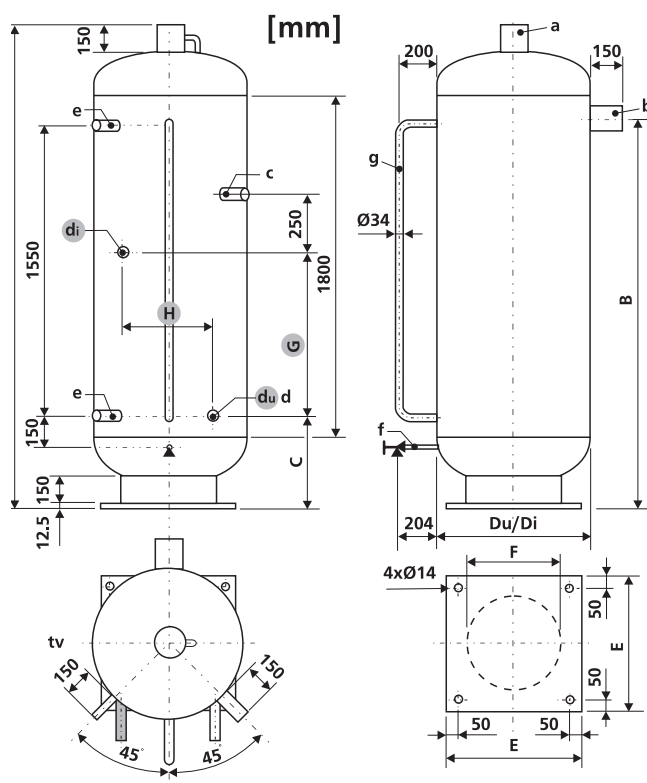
Dimensioned sketch of open/closed "flash" interstage cooler
